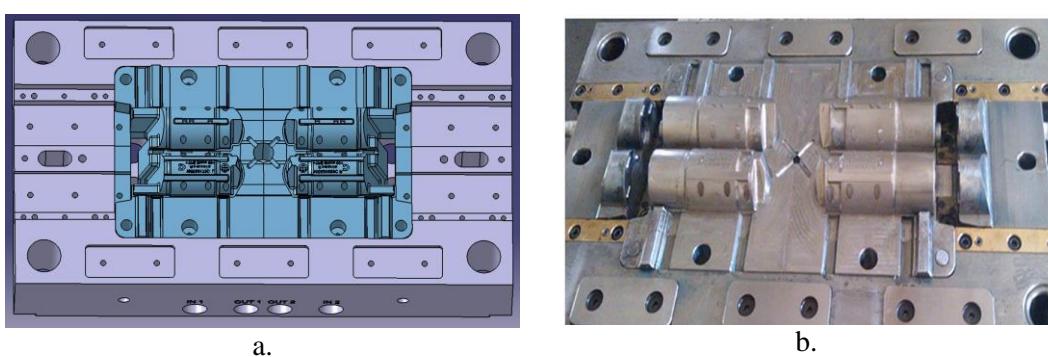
Core back plate and Core side parts: a - 3D models, b - machined parts
